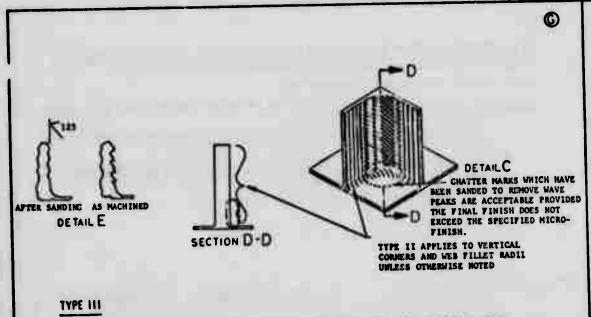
SURFACE ROUGHNESS AND TOLERANCES FOR MACHINED SURFACES - STANDARD FOR INSPECTION
